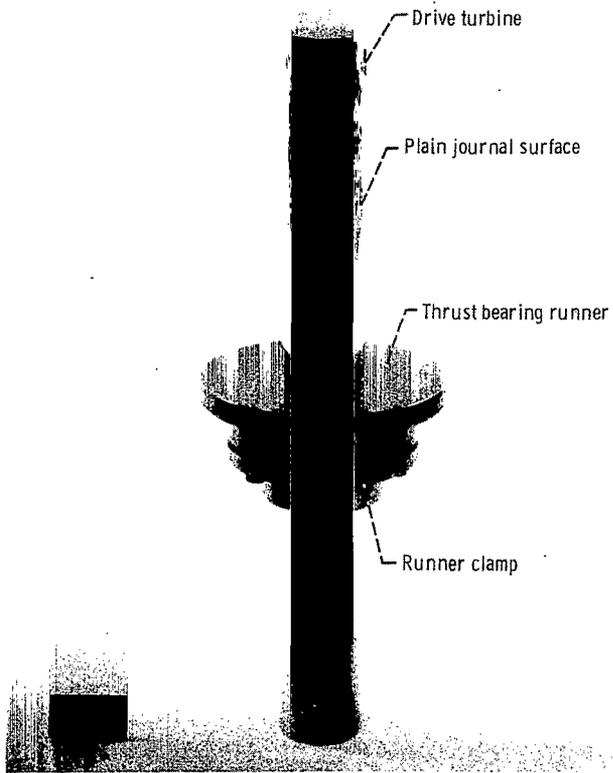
Shaft assembly with clamp on thrust bearing runner.
